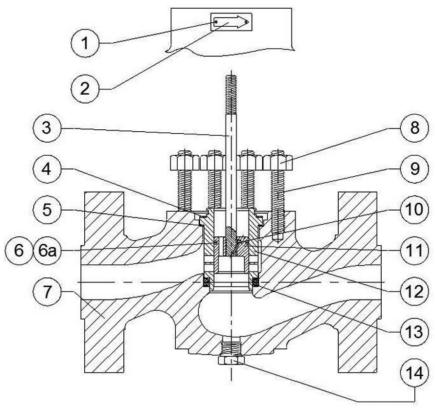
Mark H-900, H-1500 and H-2500 Valve Body Showing Mark ED Trim
